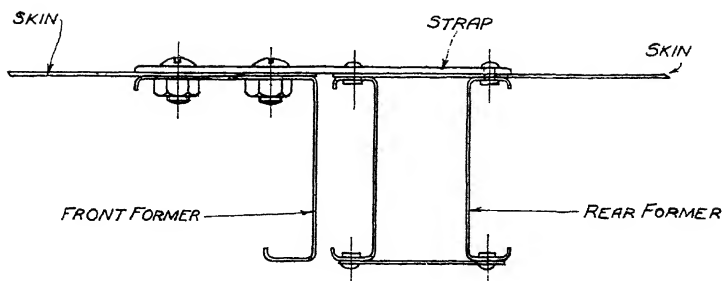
TYPICAL MONOCOQUE FUSELAGE JOINT.
